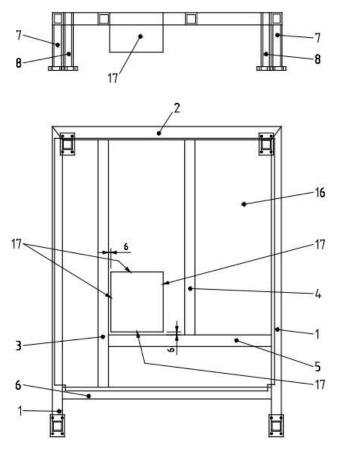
Trolley - Welded parts - Composition (b)
